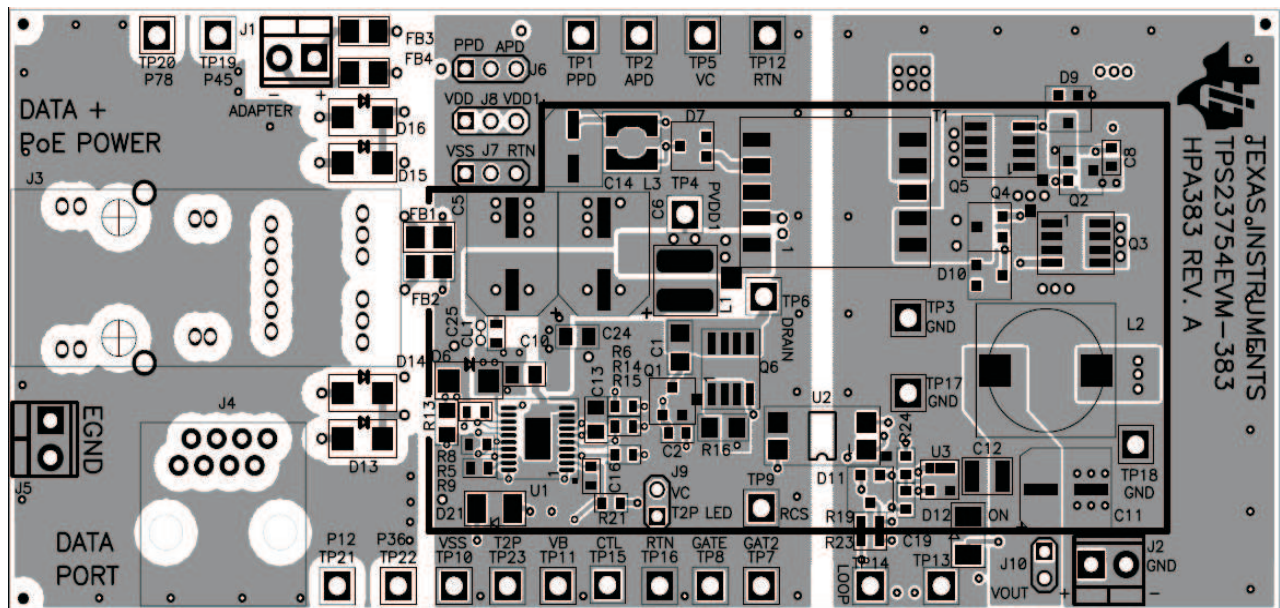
TPS23754EVM-383 EVM Parts Placement and Example Layout
